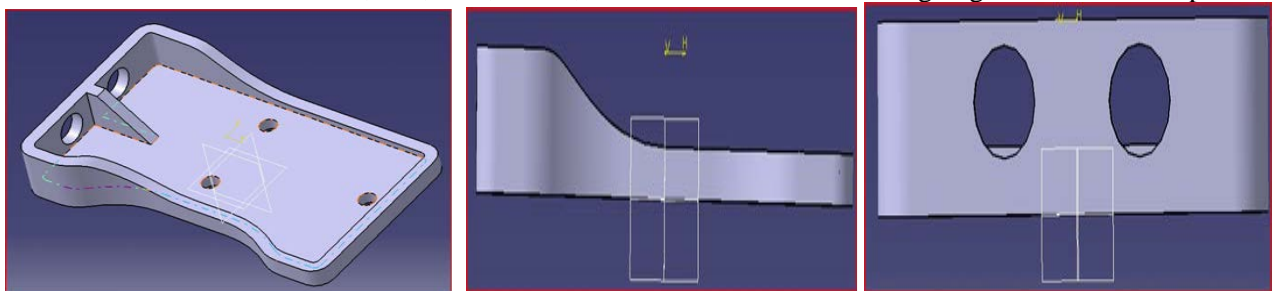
Isometric, Side and Front view of Modified Part Respectively.
